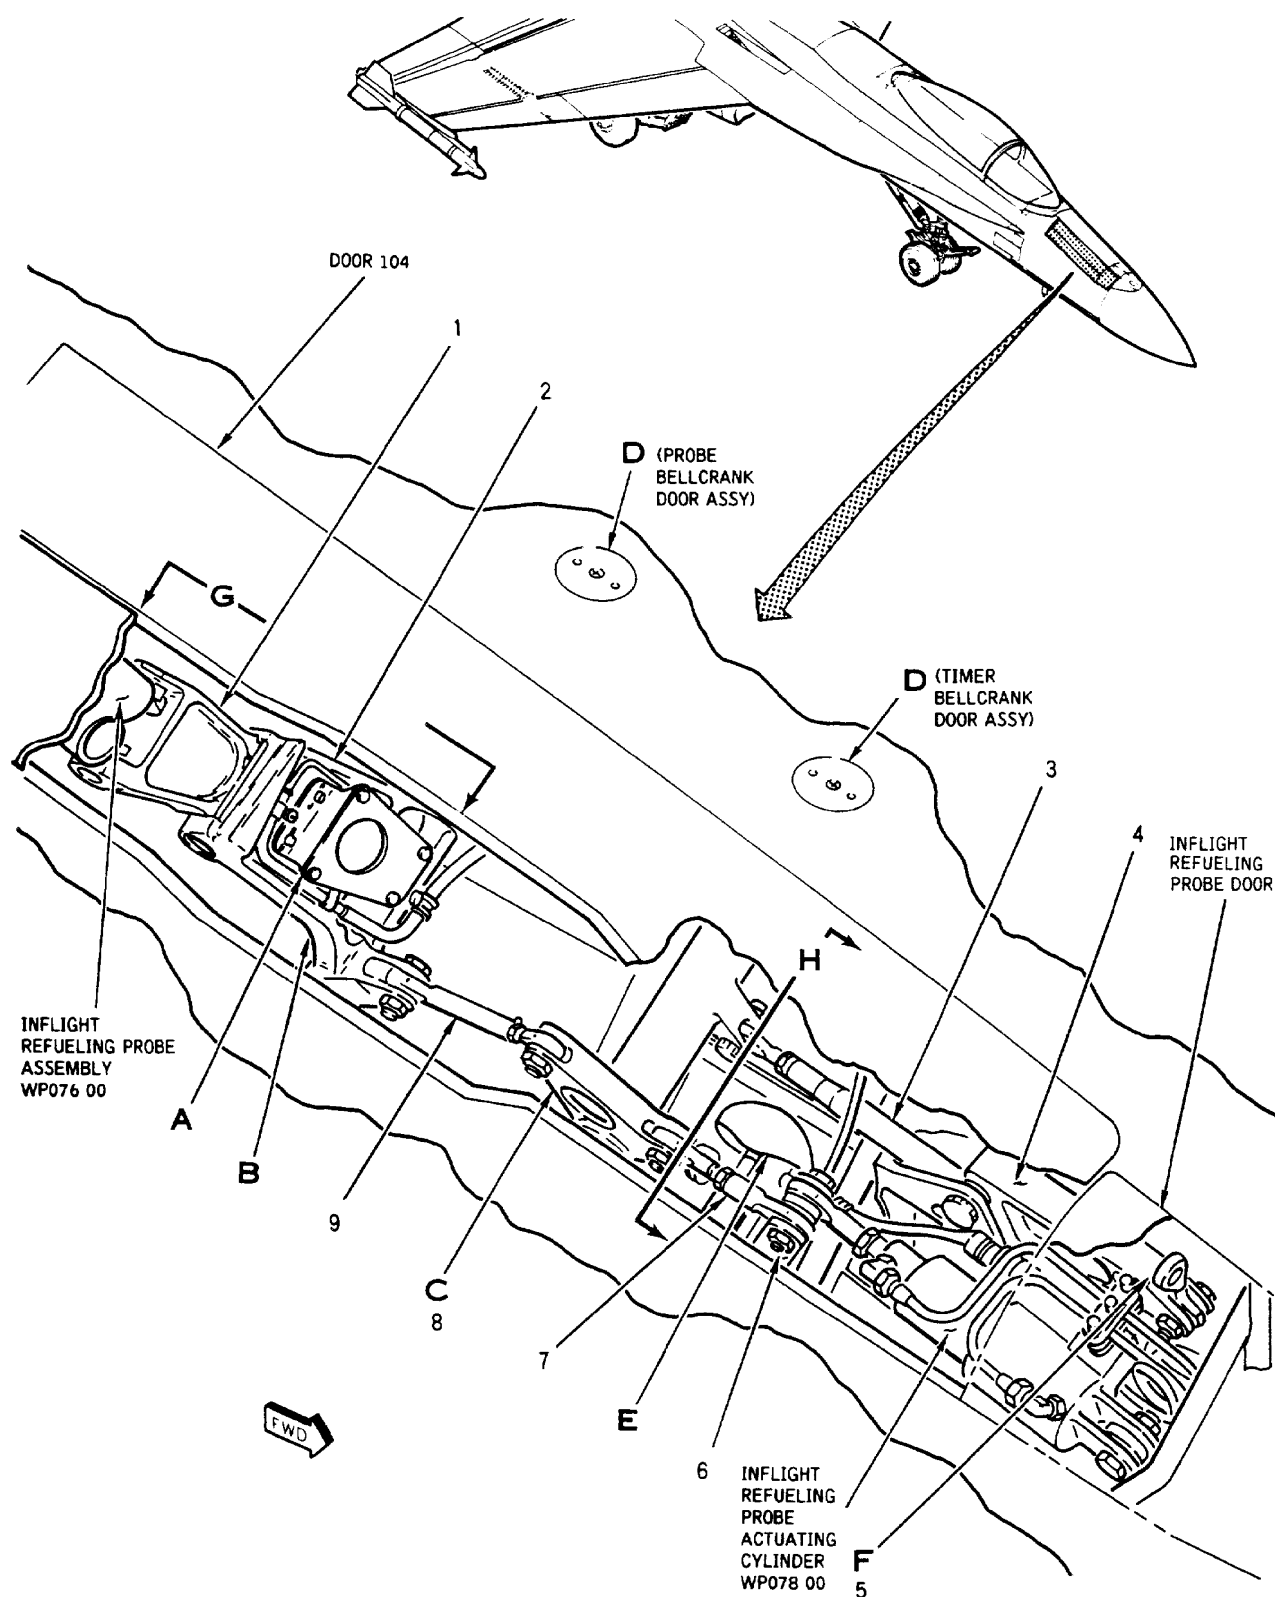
Inflight Refueling Probe and Door Drive Mechanism (Sheet 1)
